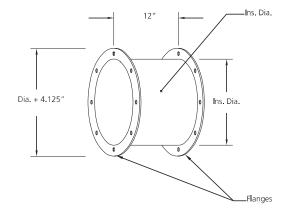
Starting Adapter-Drain (SAD) Detail
